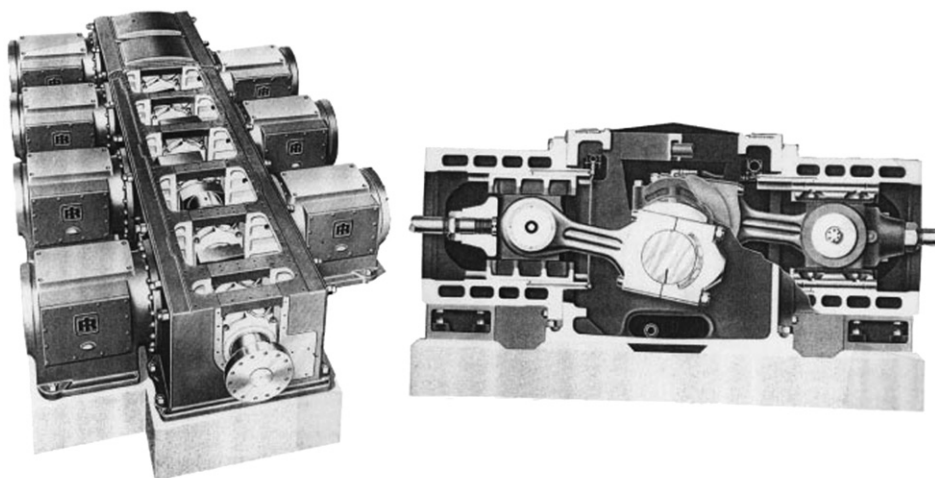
• Frame and running gear (crank case and crosshead) (Courtesy of Dresser Rand)
